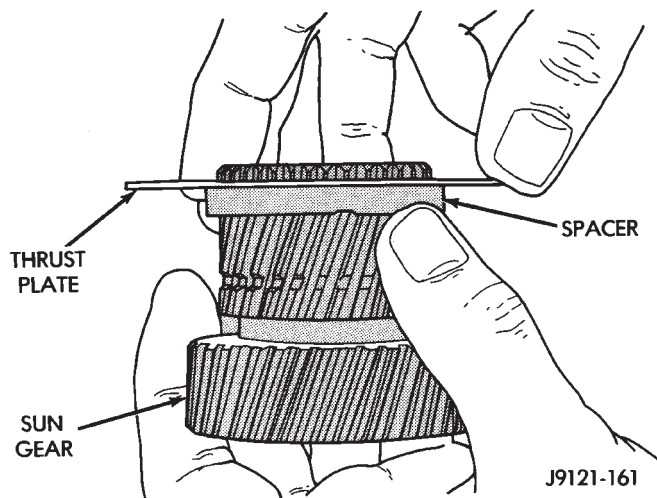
Installing Spacer And Thrust Plate On Sun Gear
